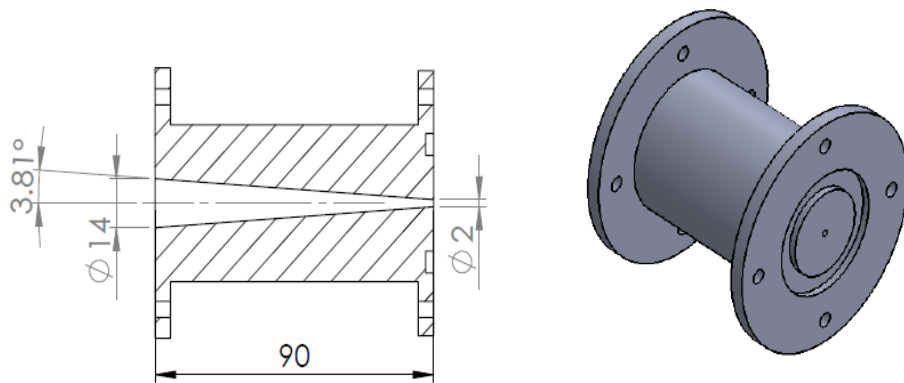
(Shows a 2D Drawing of The 90mm Diffuser)
